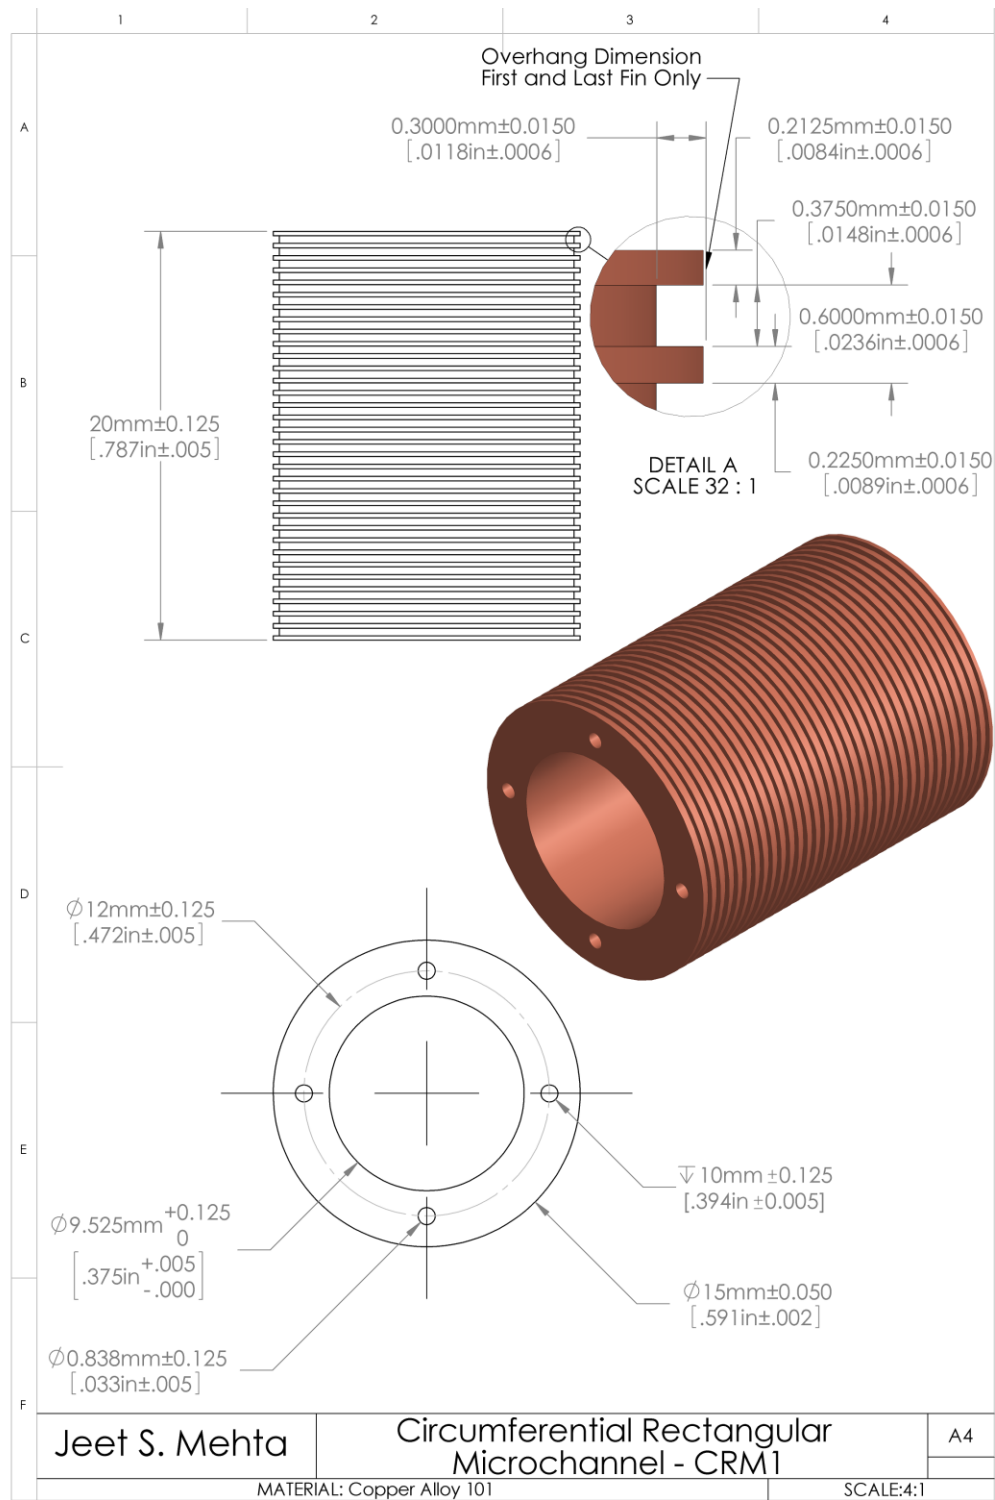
Technical drawing of the circumferential rectangular microchannel – CRM1
